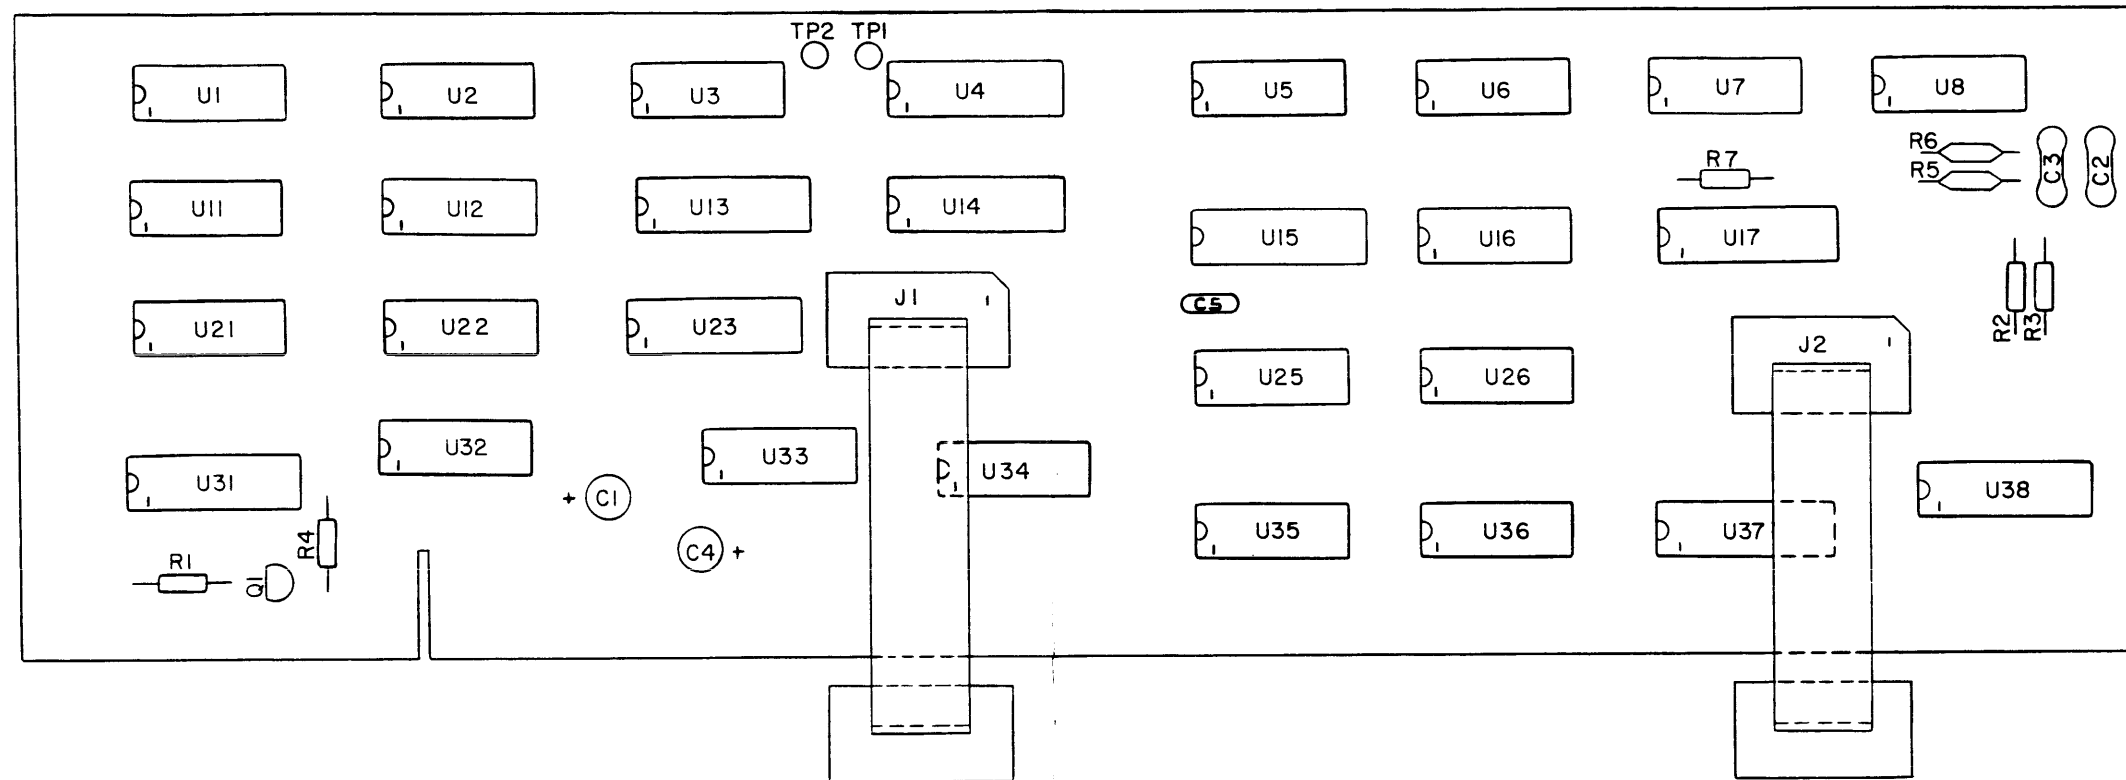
A10A2 Fast R2 A/D Converter Digital PCB Assembly
